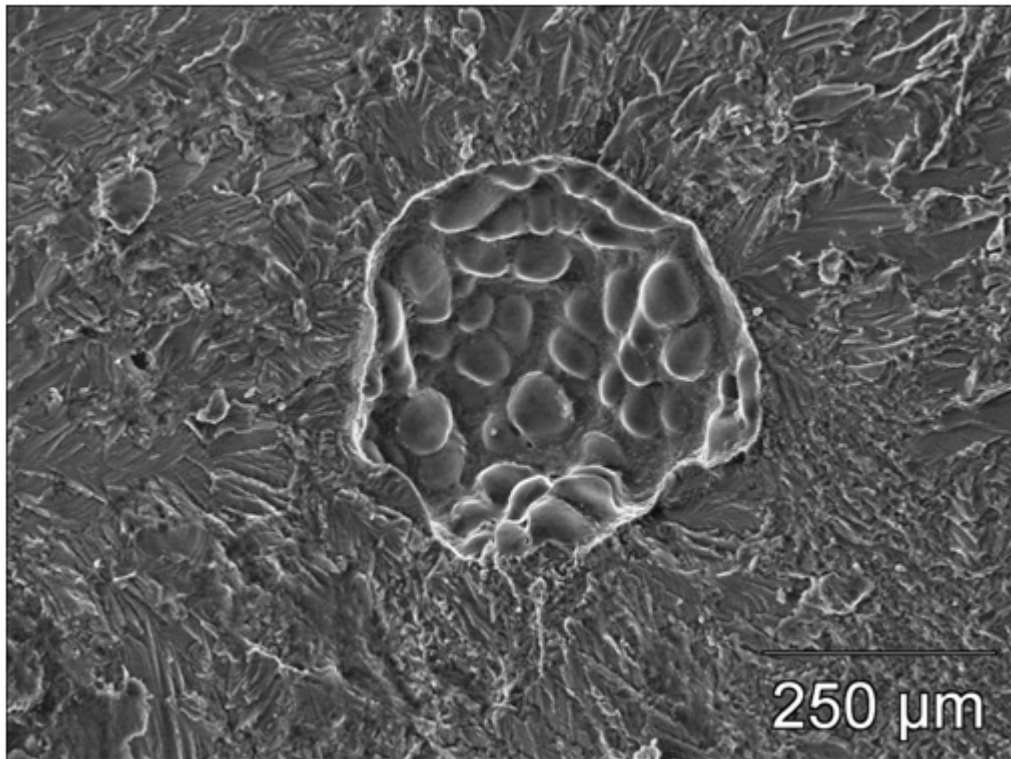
Fracture surface of as-cast 356-T6 fatigue specimen ($R=-1$, minimum load -2068 N, maximum load 2068 N, cycles to failure 859,634, defect area 0.08 mm²).
